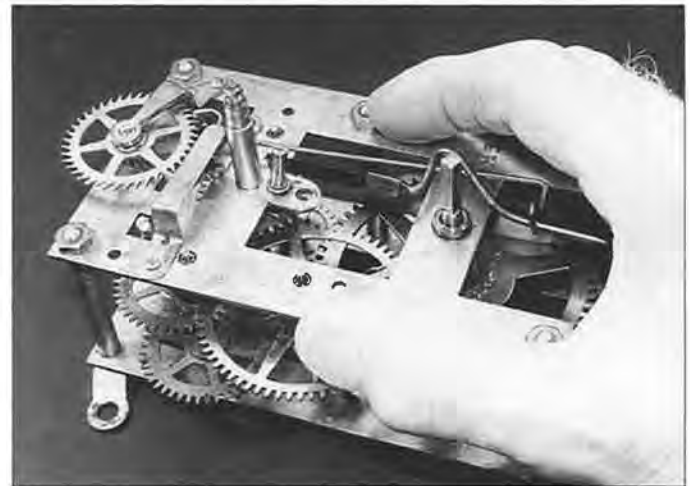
Ready for the case. Make final adjustments to the mounting lugs for perfect case fit.
